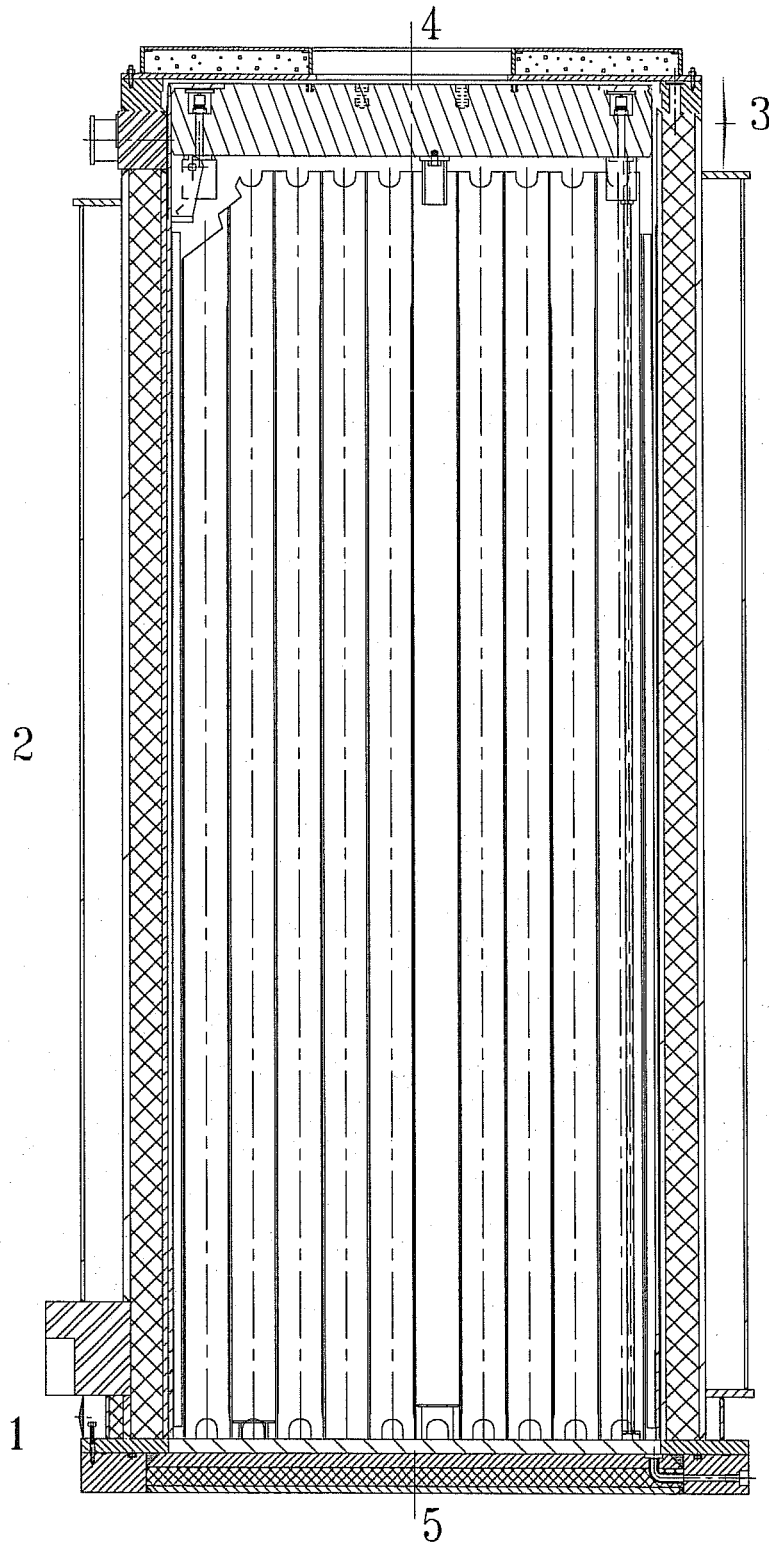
; CROSS SECTION ELEVATION VIEW OF 125 TON HI-TRAC TRANSFER CASK WITH DOSE POINT LOCATIONS
